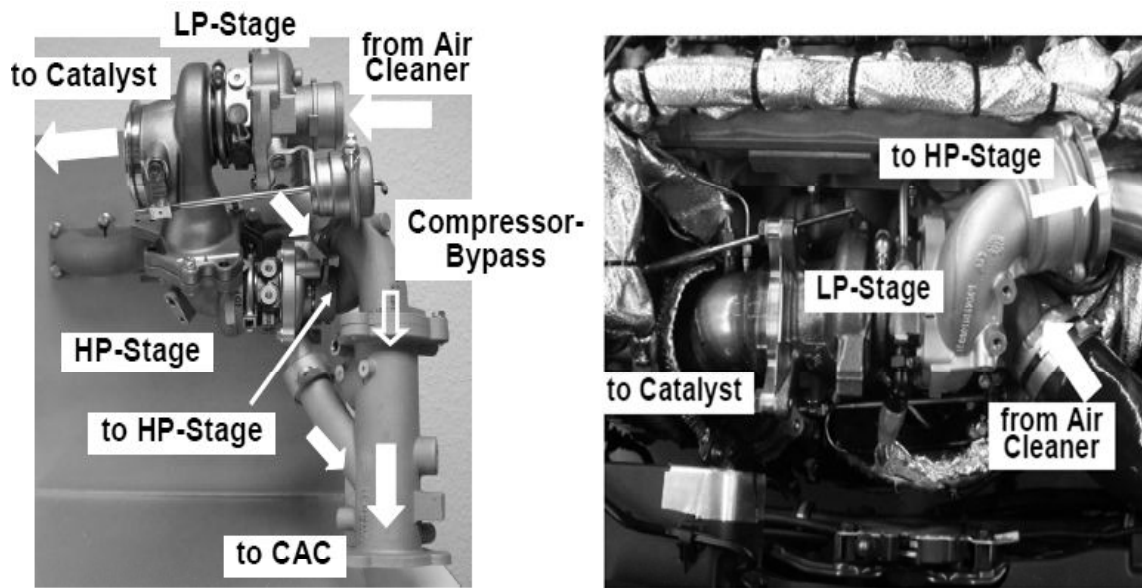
Two-stage turbocharger with Mahindra Bolero engine
